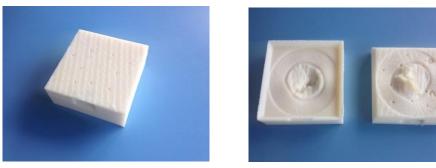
3D-printed mold for a tricuspid valve (case B): assembled (left), and disassembled (right).
